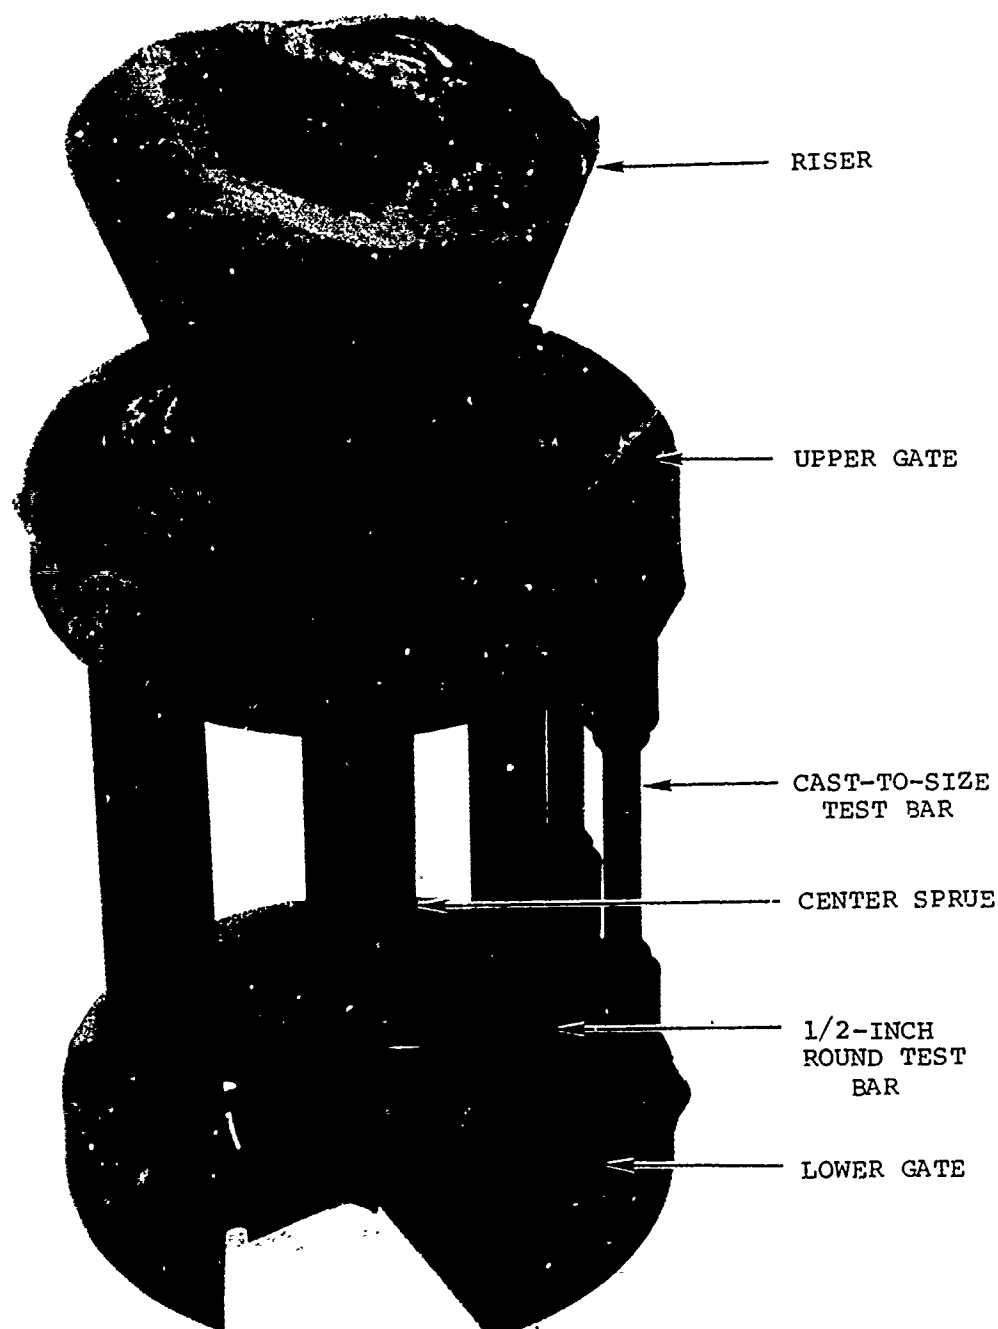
Typical Appearance of Test Bar Cluster Casting. Note the Presence of Gas Voids on Top Surfaces of Upper and Lower Gates (Arrows). This Porosity is not Evident on Bottom Surfaces (Pour 14).
